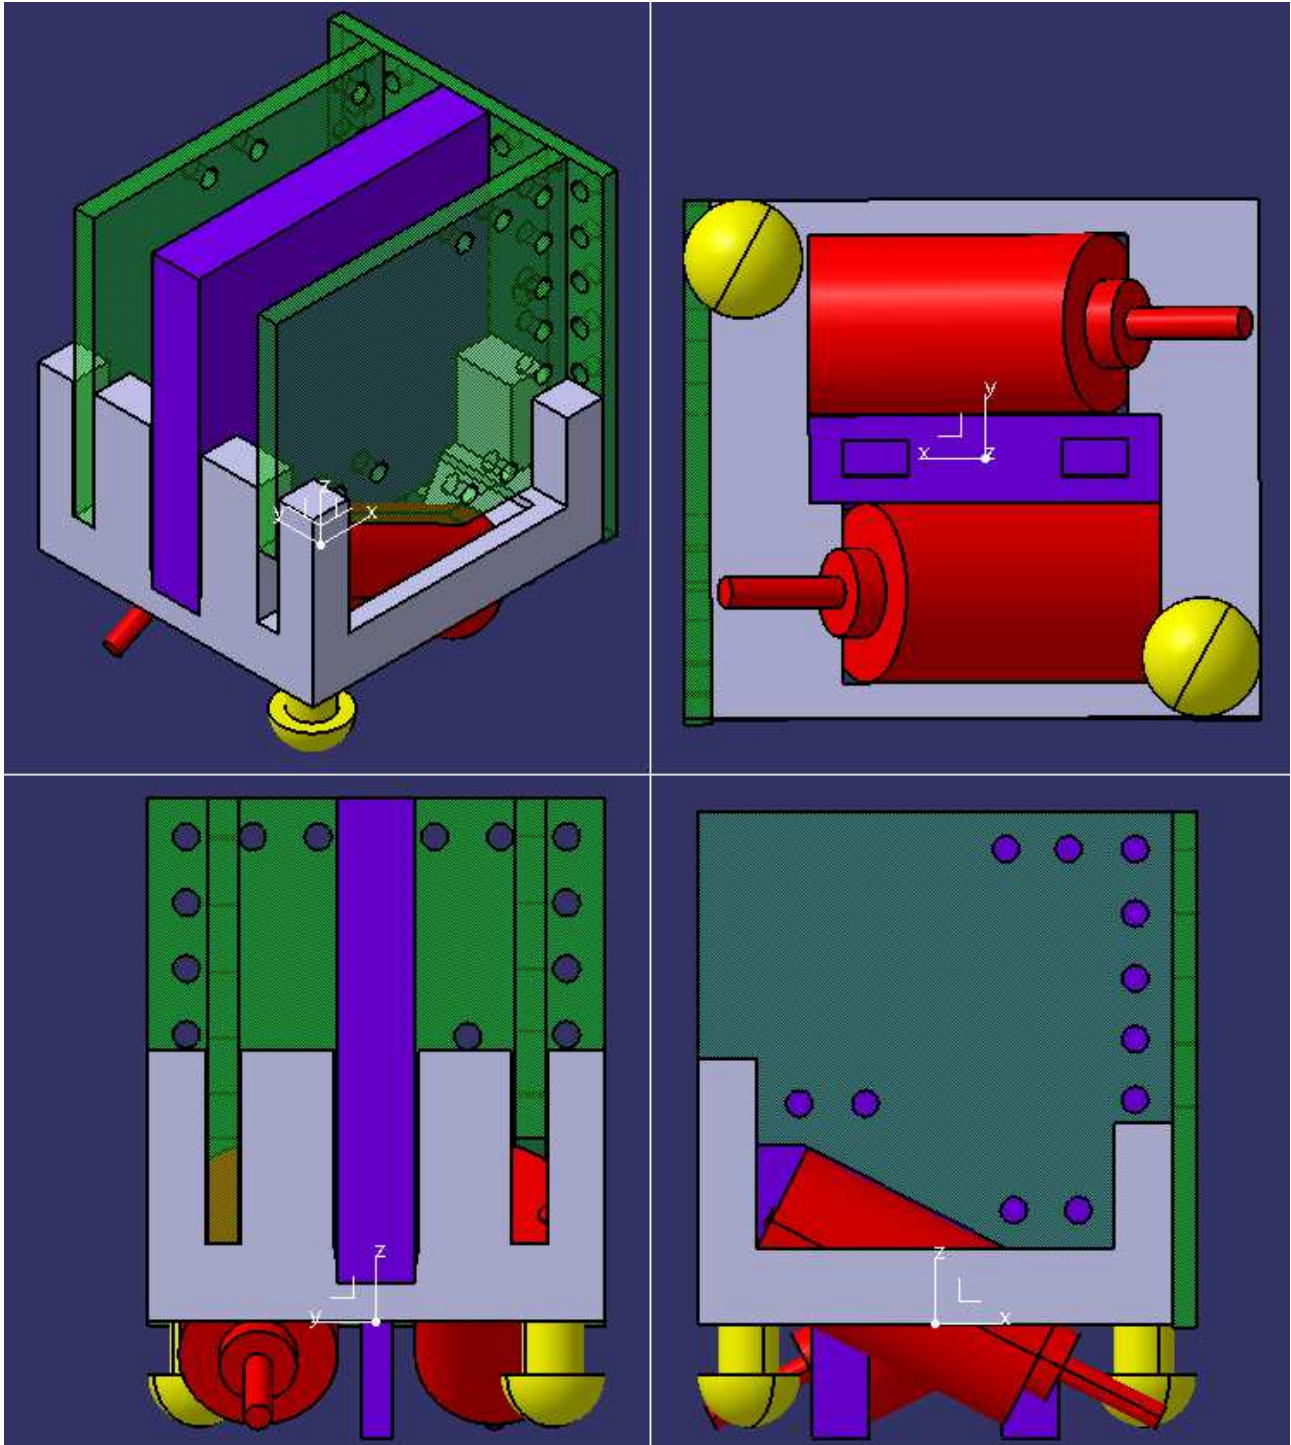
Robot CAD model. Isometrical, bottom, side, and rear view. Grey: chassis, green: PCBs, purple: battery, red: motors, yellow: rivets.
